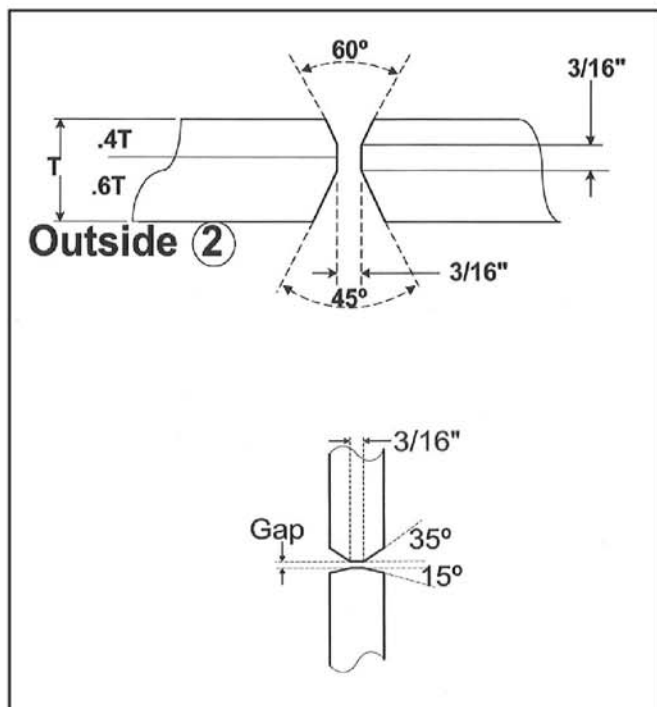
Typical detail for full fusion (two-sided) butt weld, done properly
